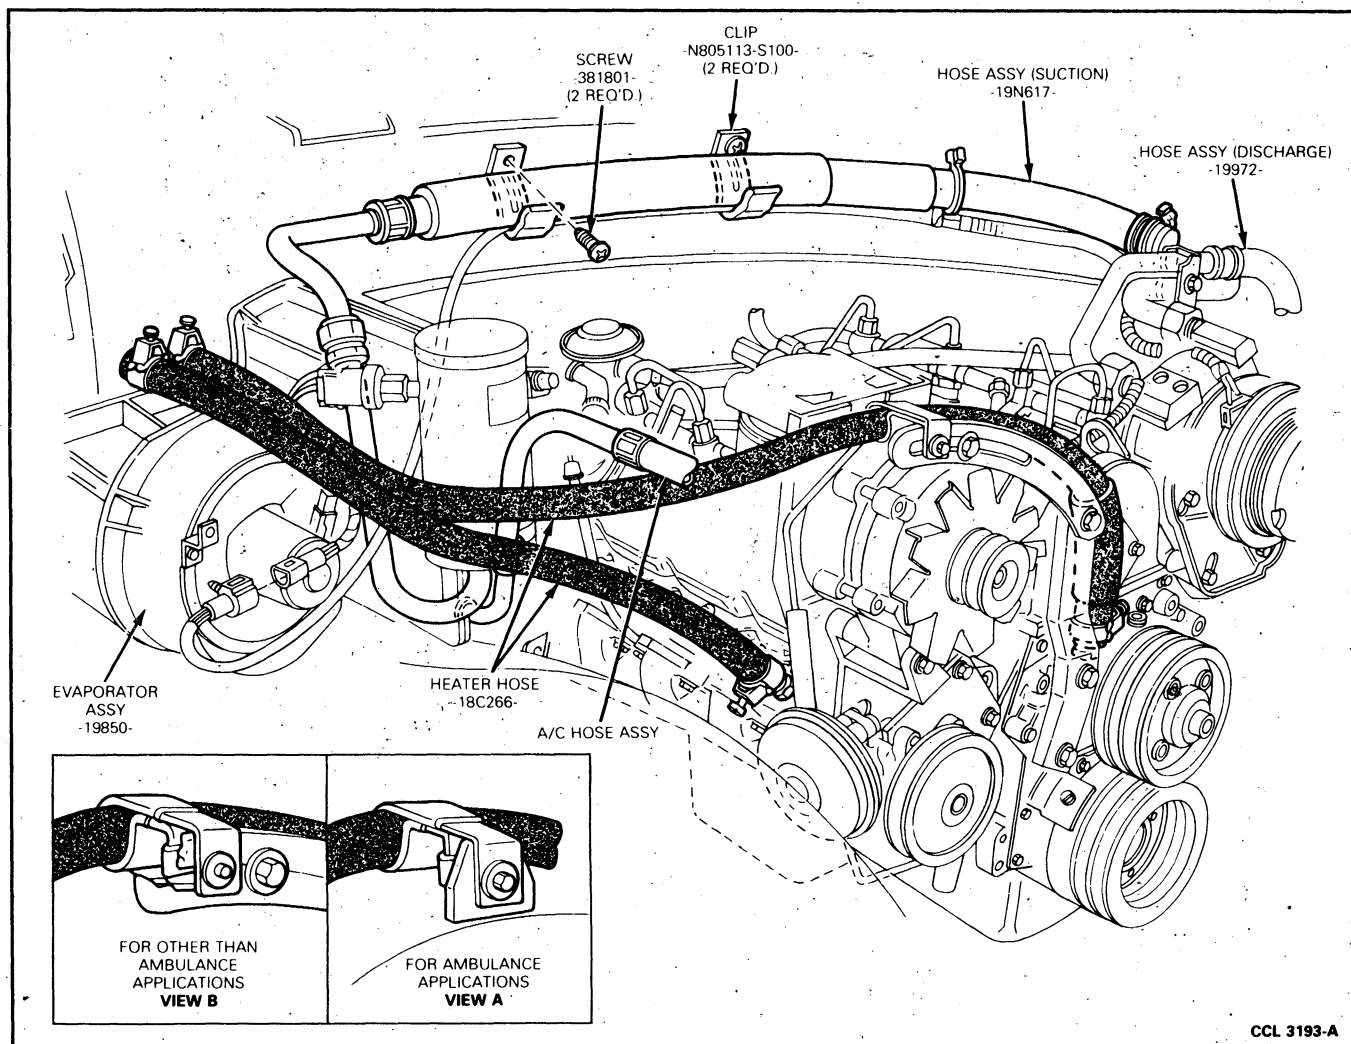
Heater Hose Installation—7.3L (447 CID) Diesel Engine
